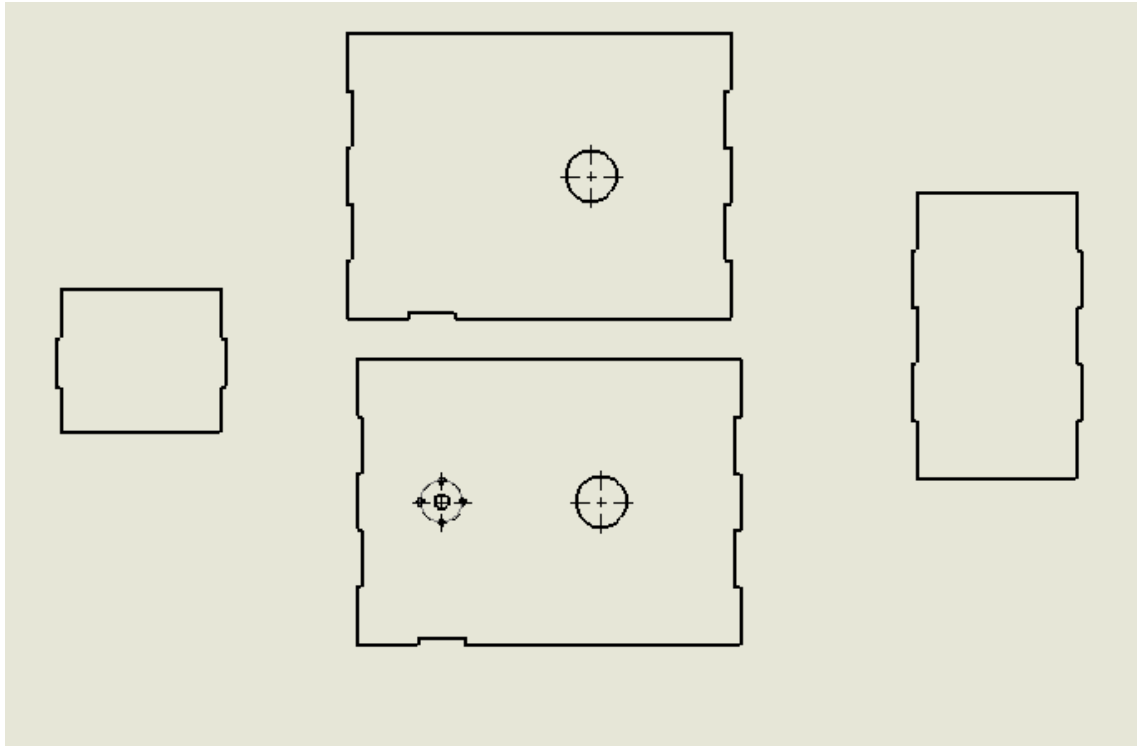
| The cutout drawing for all the gearbox pieces for printing
